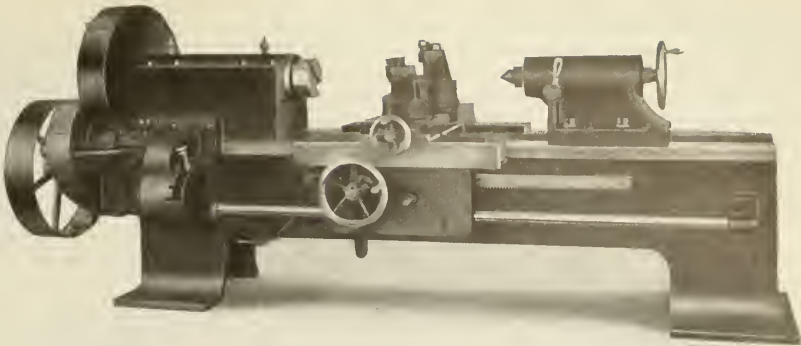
Pottstown 24-inch Lathe for machining Shells from 9 to 12 Inches
